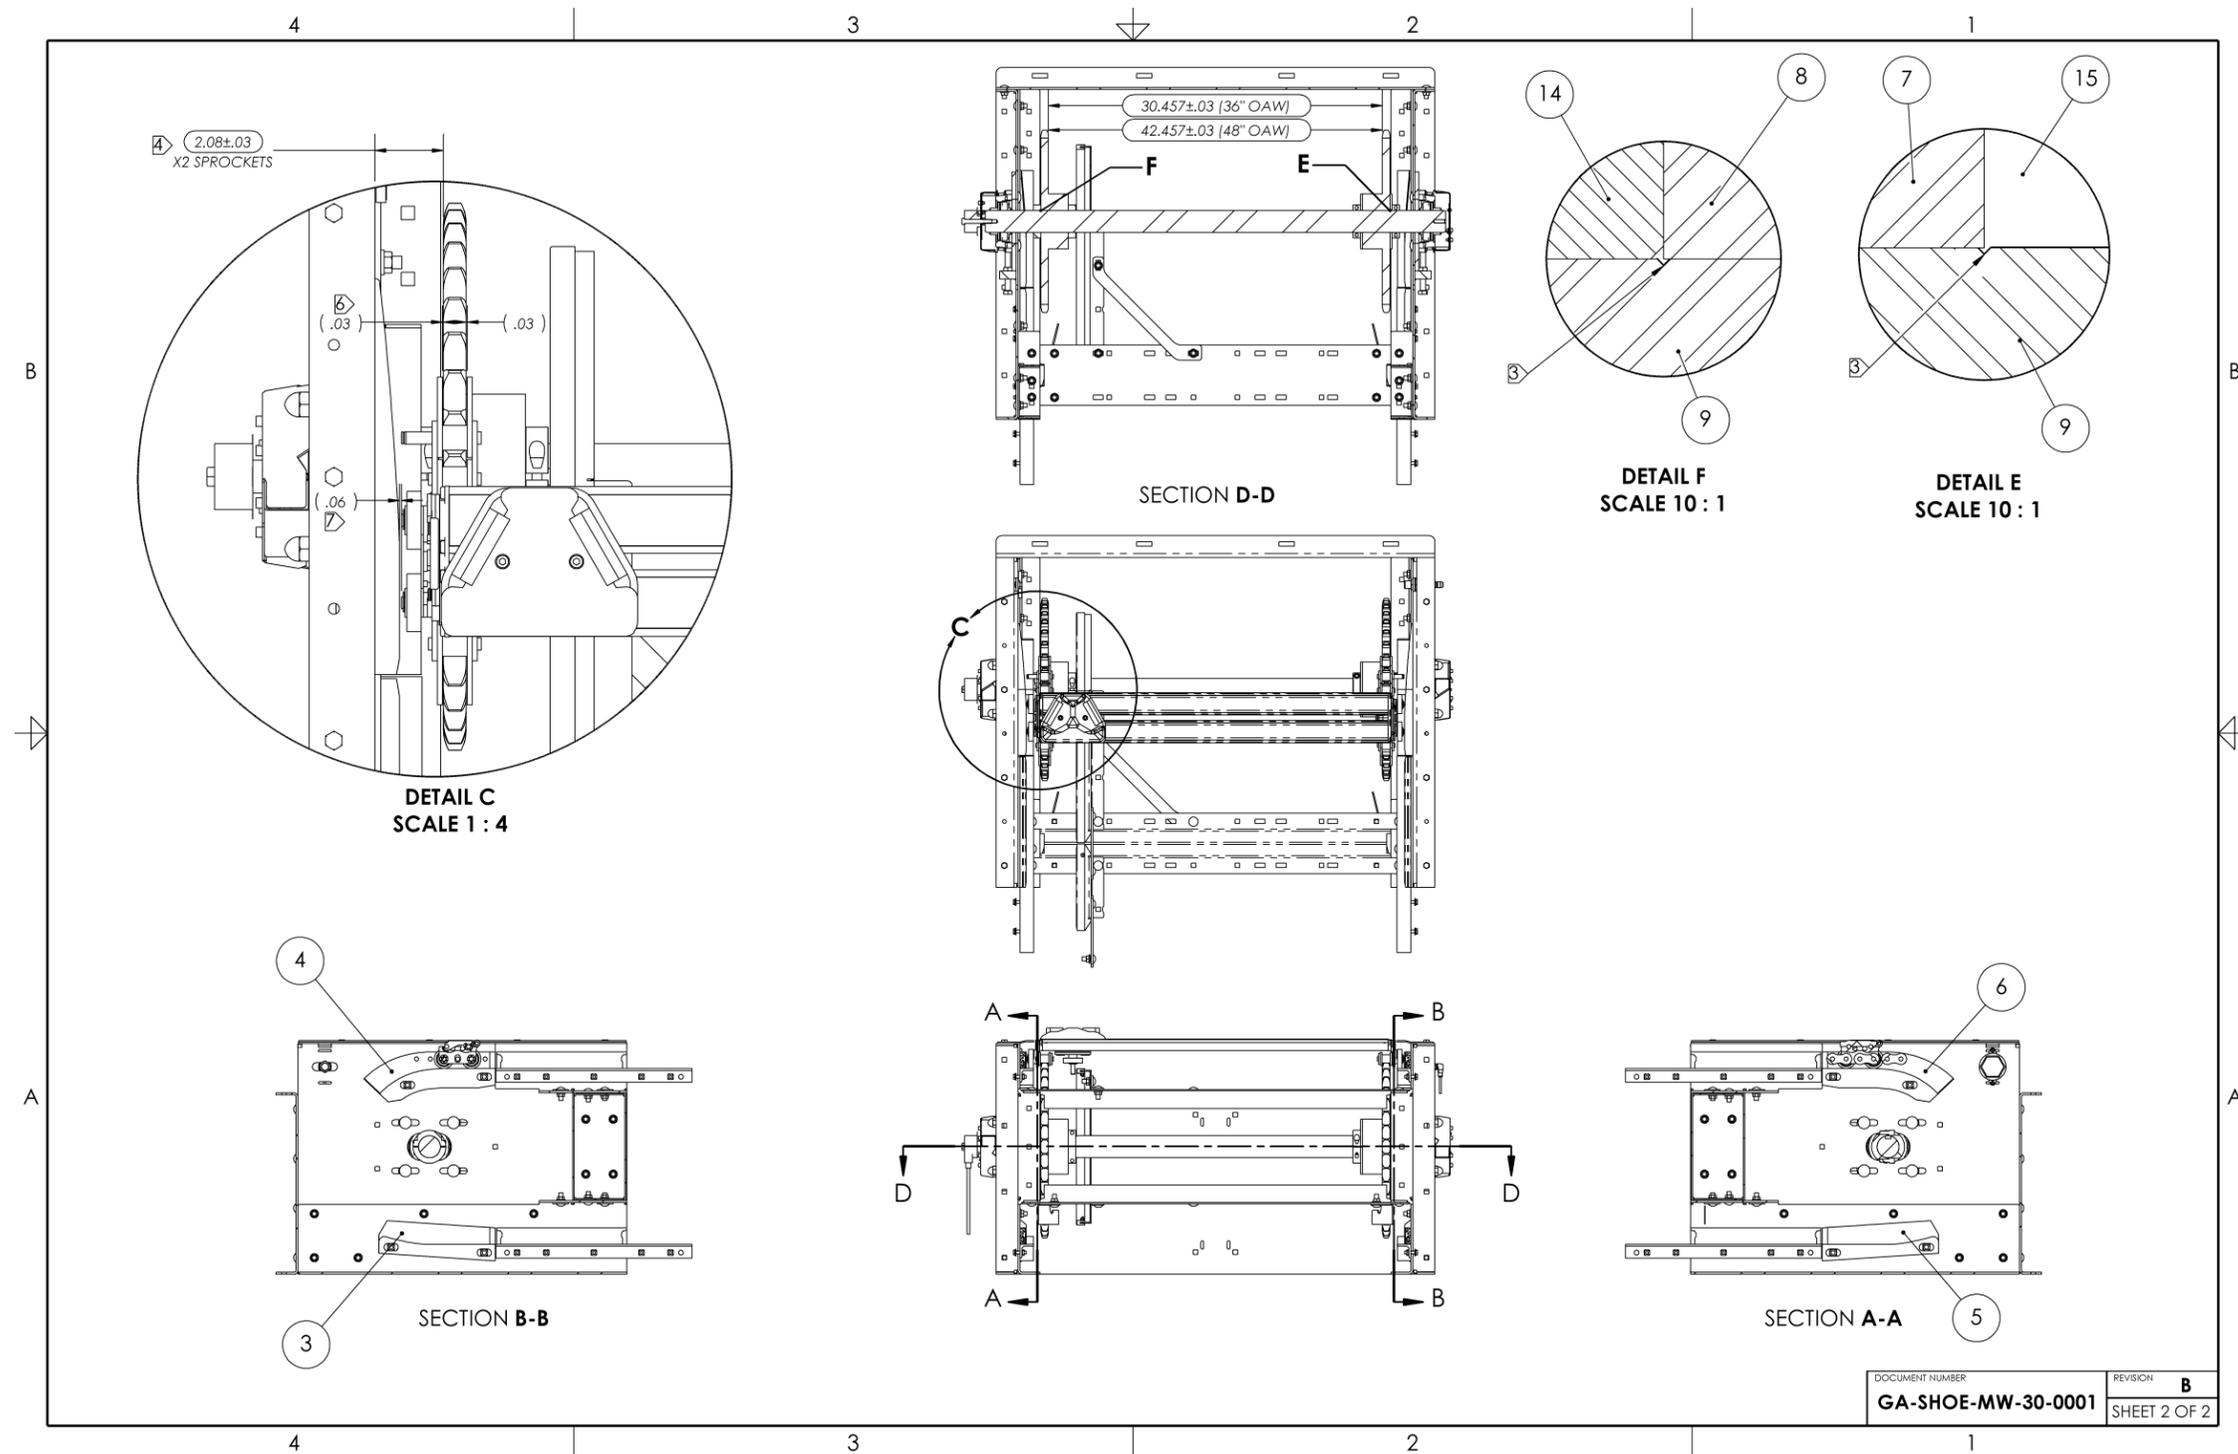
General Arrangement, Shoe Sorter Tail, Sheet 2 of 2
